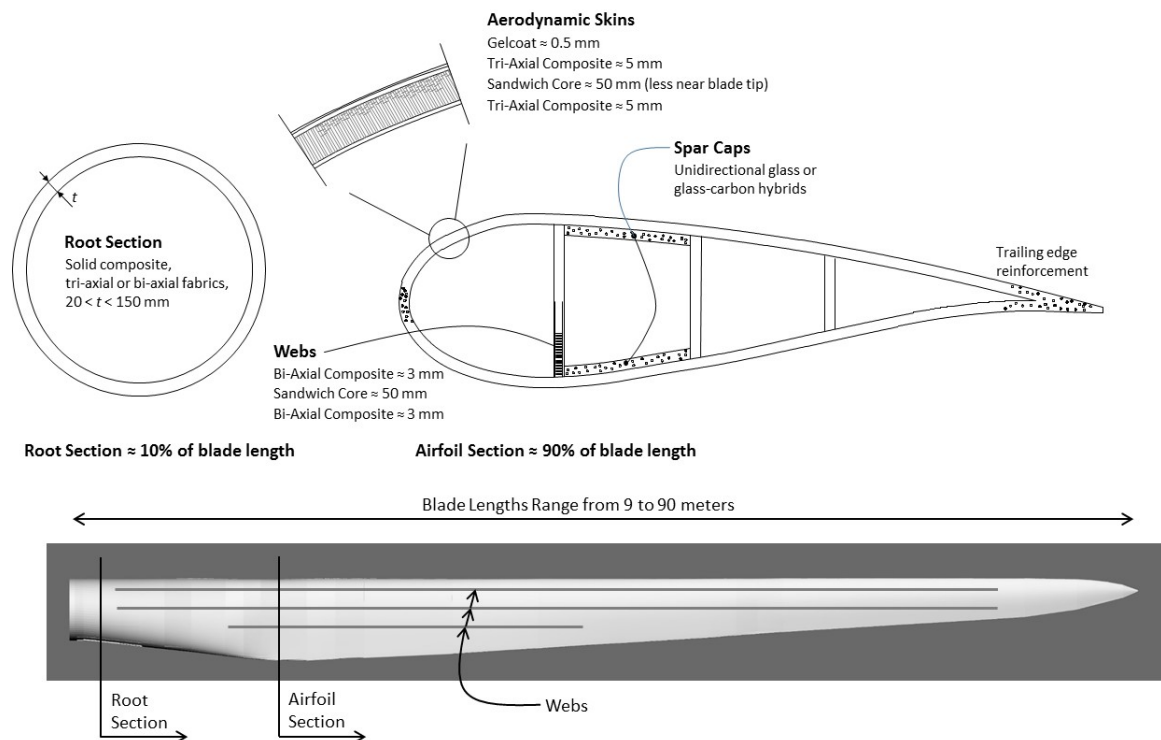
Typical blade construction (adapted from Gentry et al. (2018)).
